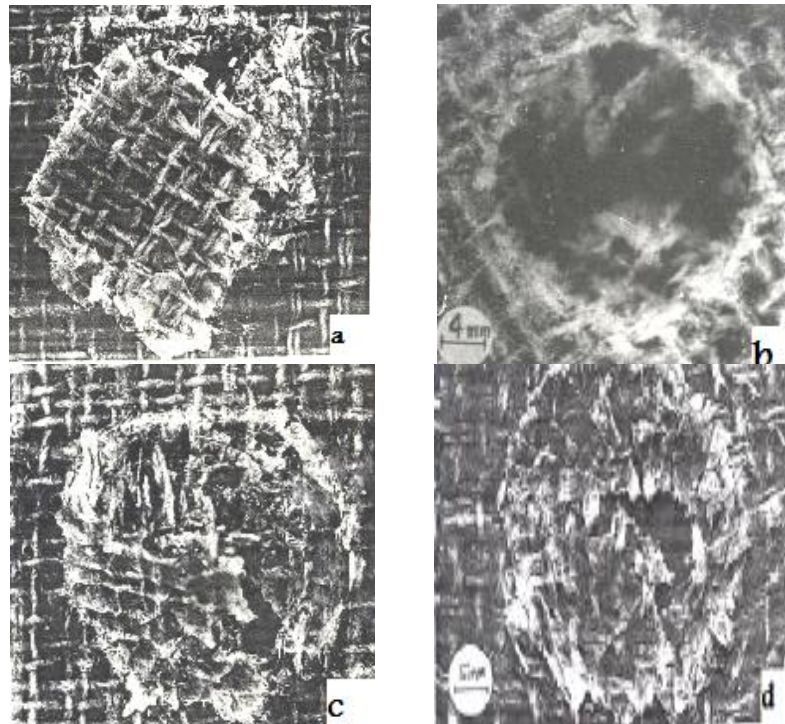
Morphology of impact fracture tested at, a - 27 C°, b -50 C°, c- 75 C° and d-100C°
